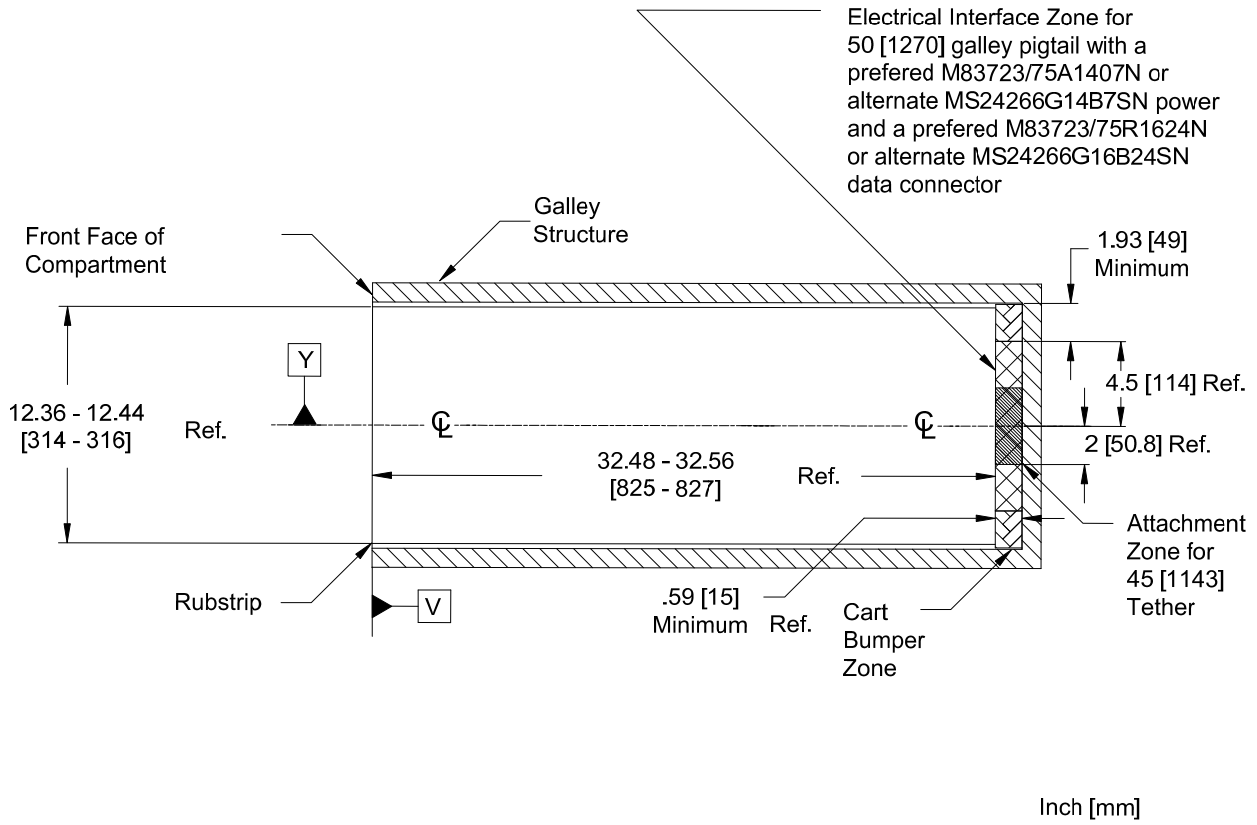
C – GAIN Size 3 Compartment Structure and Electrical Interface Drawing - Plan View
